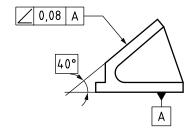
Examples of geometrical tolerancing (Cont.)
